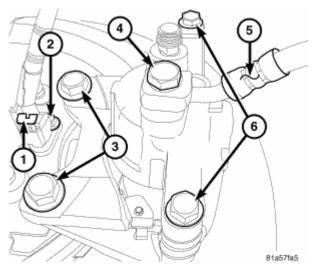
Identifying Bolts, Brake Hose & Brake Hose Banjo Bolt Courtesy of CHRYSLER LLC
